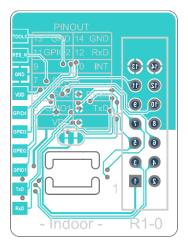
Sensor Board RRH46410 Layout with PIN Configuration and Additional Side Pads
